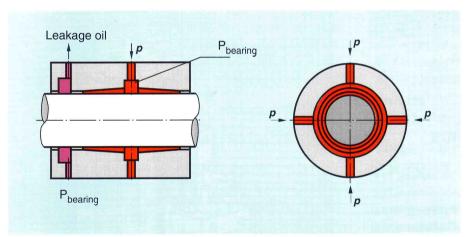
Schematic diagram of hydrostatic tapered gap bearing supporting piston rod. The bearing pressure in the taper gap bearing is equivalent to the operating pressure (P)
